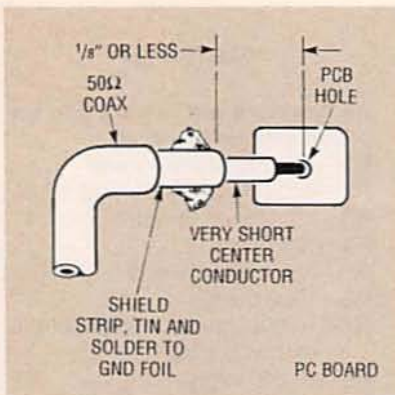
ALL COAXIAL LEADS going to the PC board must be kept as short as possible. Solder them to the board as shown here.
